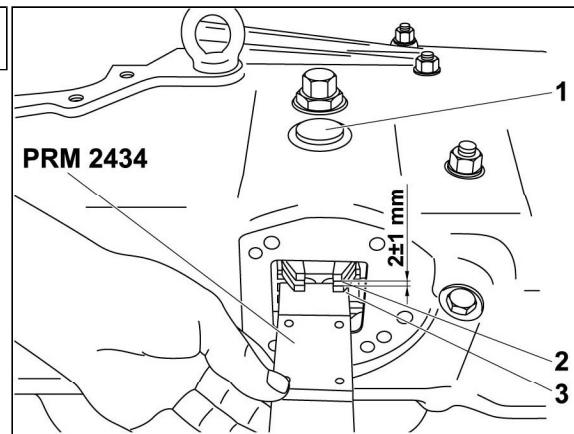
Inspection of the gearshift mechanism clearance adjustment
